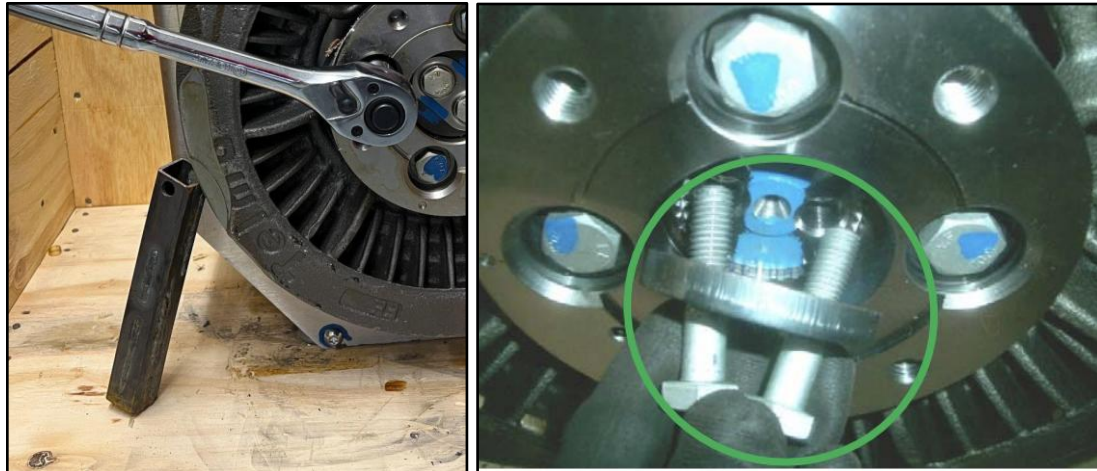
Bar to lock the rotation (left); Shaft screws taken off (right)
